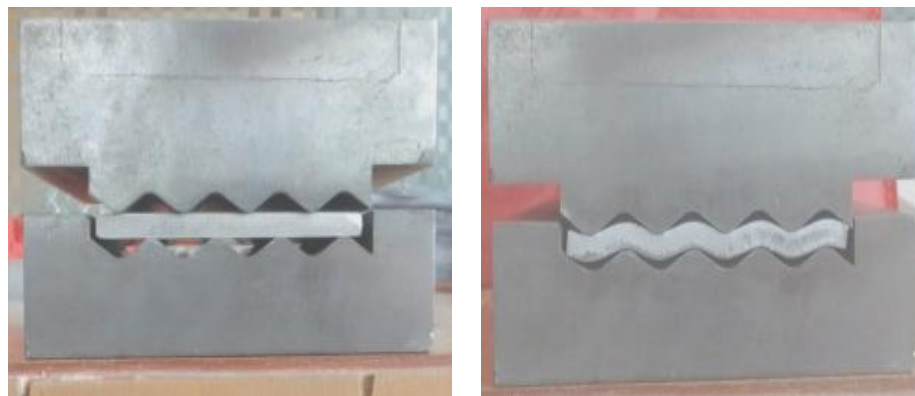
a) die assembly with flat specimen and b) die assembly with corrugated specimen
